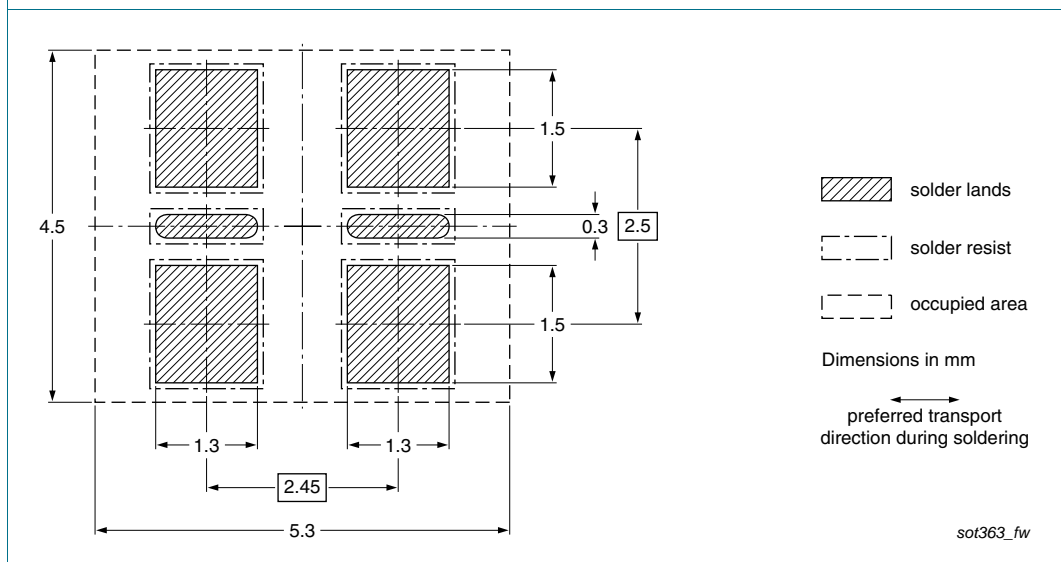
Wave soldering footprint BAV99S (SOT363/SC-88)
